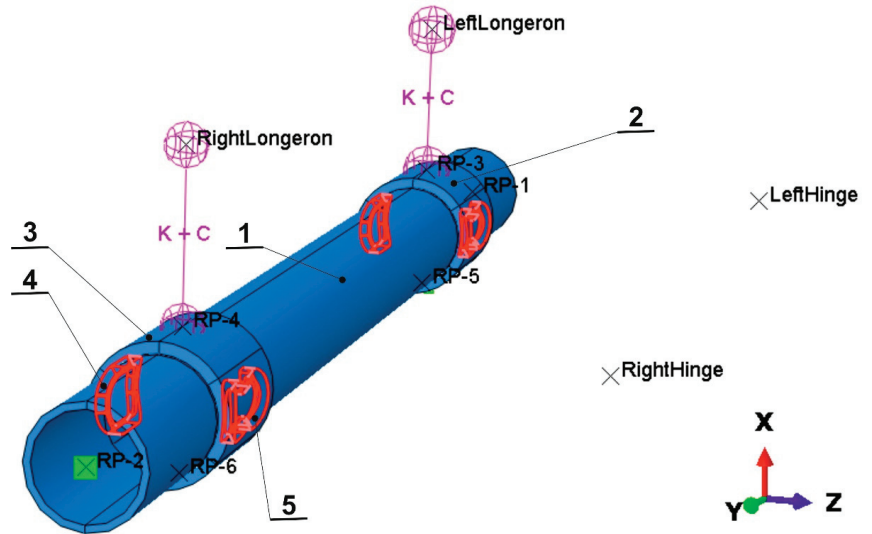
Assembly of the axle with constraint points on longerons and hinges: 1—axis; 2, 3—bushings; 4, 5—angle welds. RightLongeron, LeftLongeron, RightHinge and LeftHinge points have a rotational degree of freedom round the Y axis only. Between points RightHinge and RP-4, as well as RP-6, is rigid body type connection to the wishbone and a similar part is in model at the left side. Vehicle front at right.
